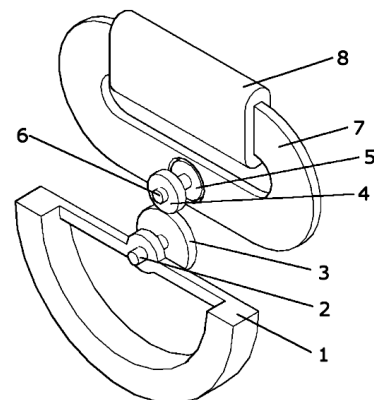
Diagram of the mechanical unit of the converter: 1 — sector; 2 — shaft; 3, 4 — gear cogwheels; 5 — rotor with permanent magnet; 6 — driven shaft; 7 — stator; 8 — induction coil.
